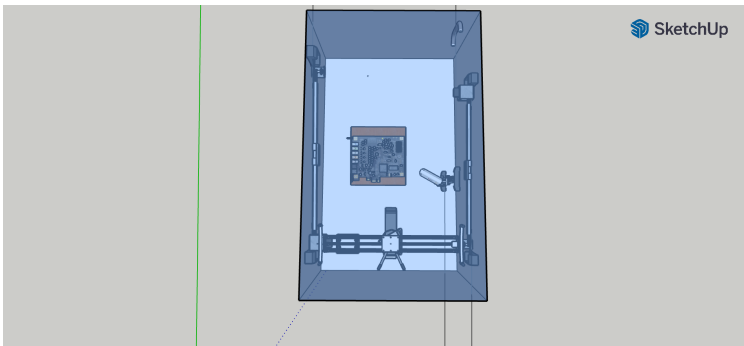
Semi-Automated Inspection System (Top View)
